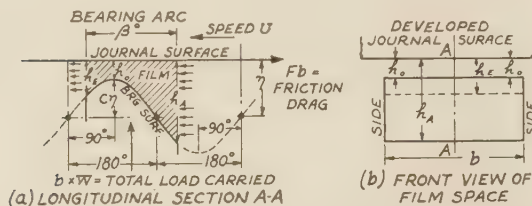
, CURVED-WEDGE FILM OF CLEARANCE BEARING
